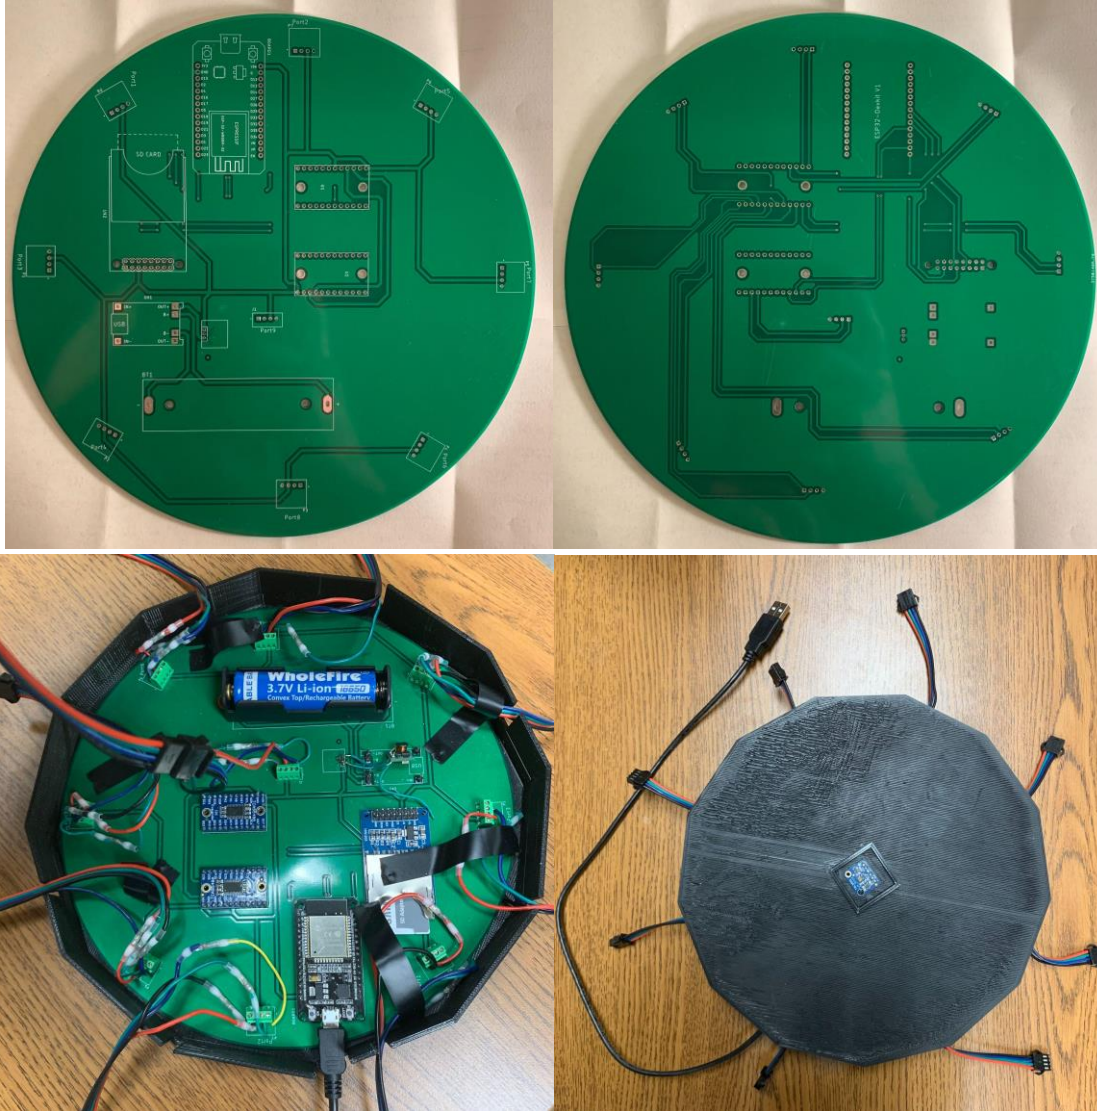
and 7d (Bottom) - Front and back of the blank PCB.
